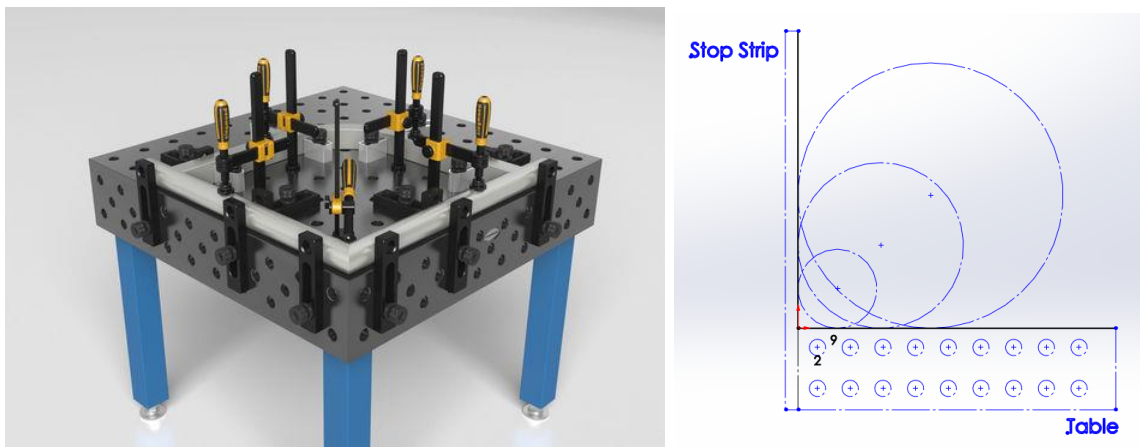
Pipe Alignment (*Strong Hand Tools, 2018*) and Clamping
